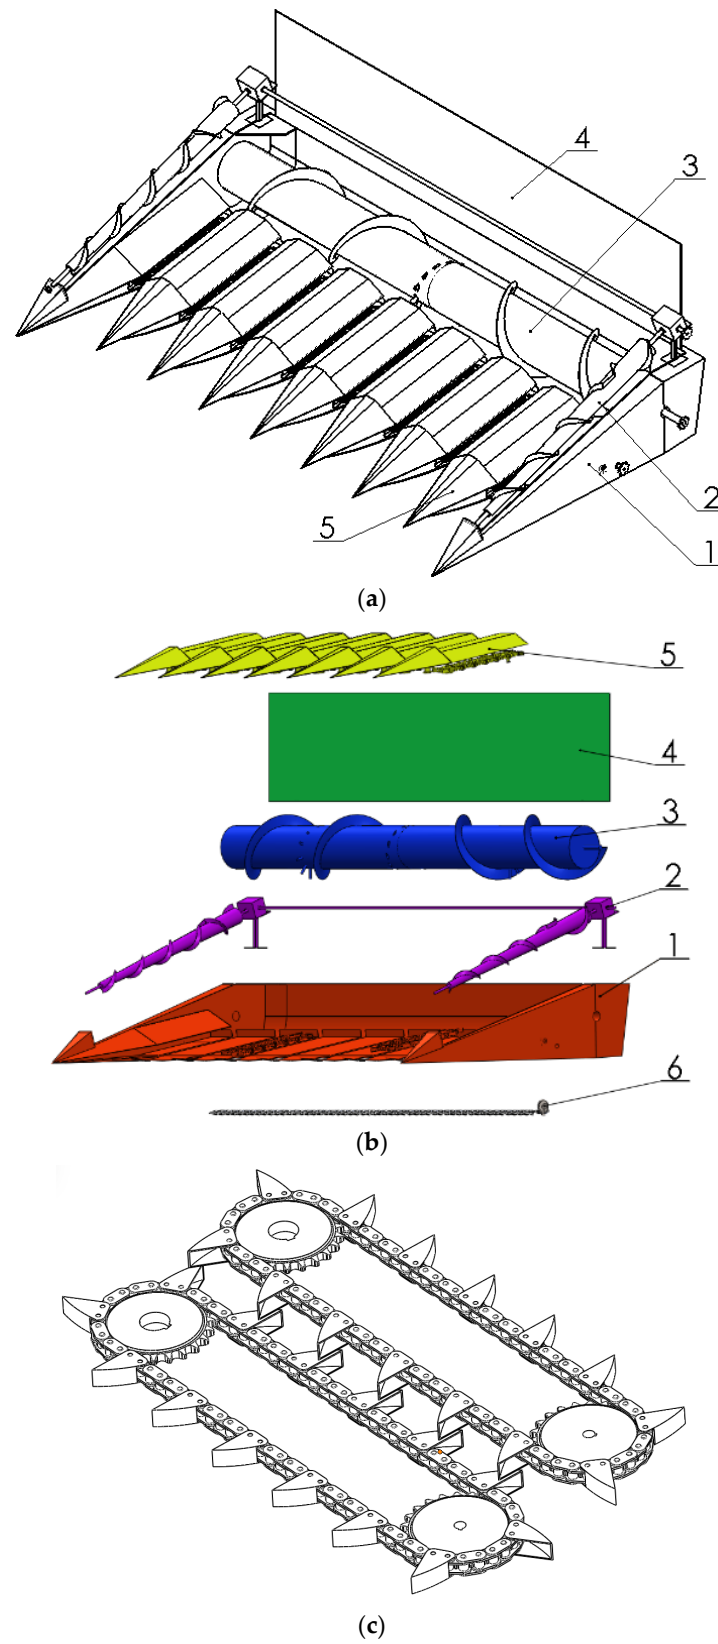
The schematic diagram of the double-chain combine harvester header structure. 1: Header frame; 2: Grain-lifting cones; 3: Spiral conveyor; 4: Baffle plate; 5: Dividers; 6: Cutter. (a) Double-chain millet combine harvester header diagram; (b) The exploded view of the double-chain millet combine harvester header; (c) Schematic diagram of the double-chain structure in a single divider.
